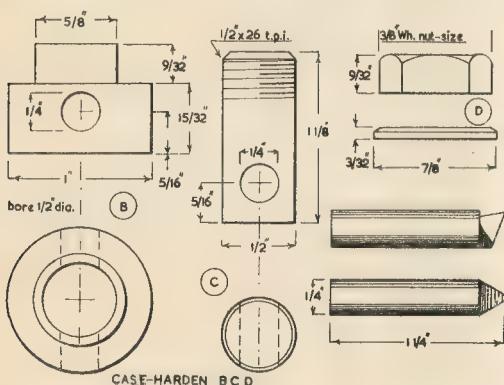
The swivelling tool parts. B the clamping collar; C and D the draw-bolt
